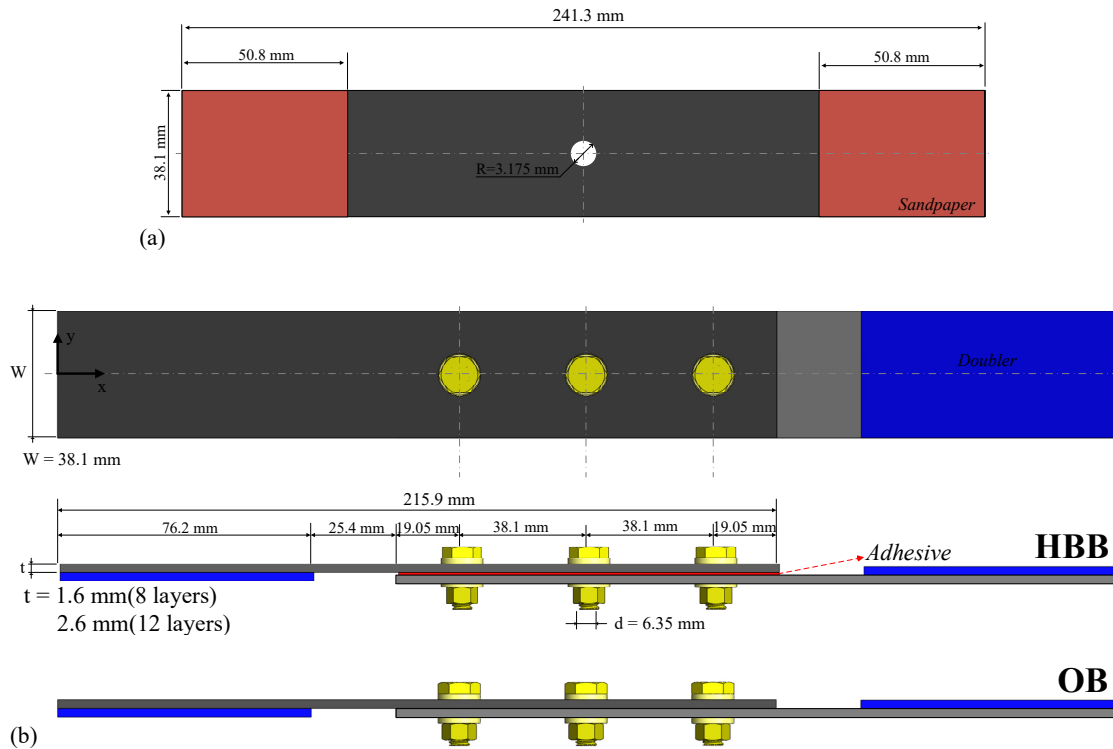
Specimen geometry and dimensions: (a) OHT joints; and (b) OB and HBB SL joints.
